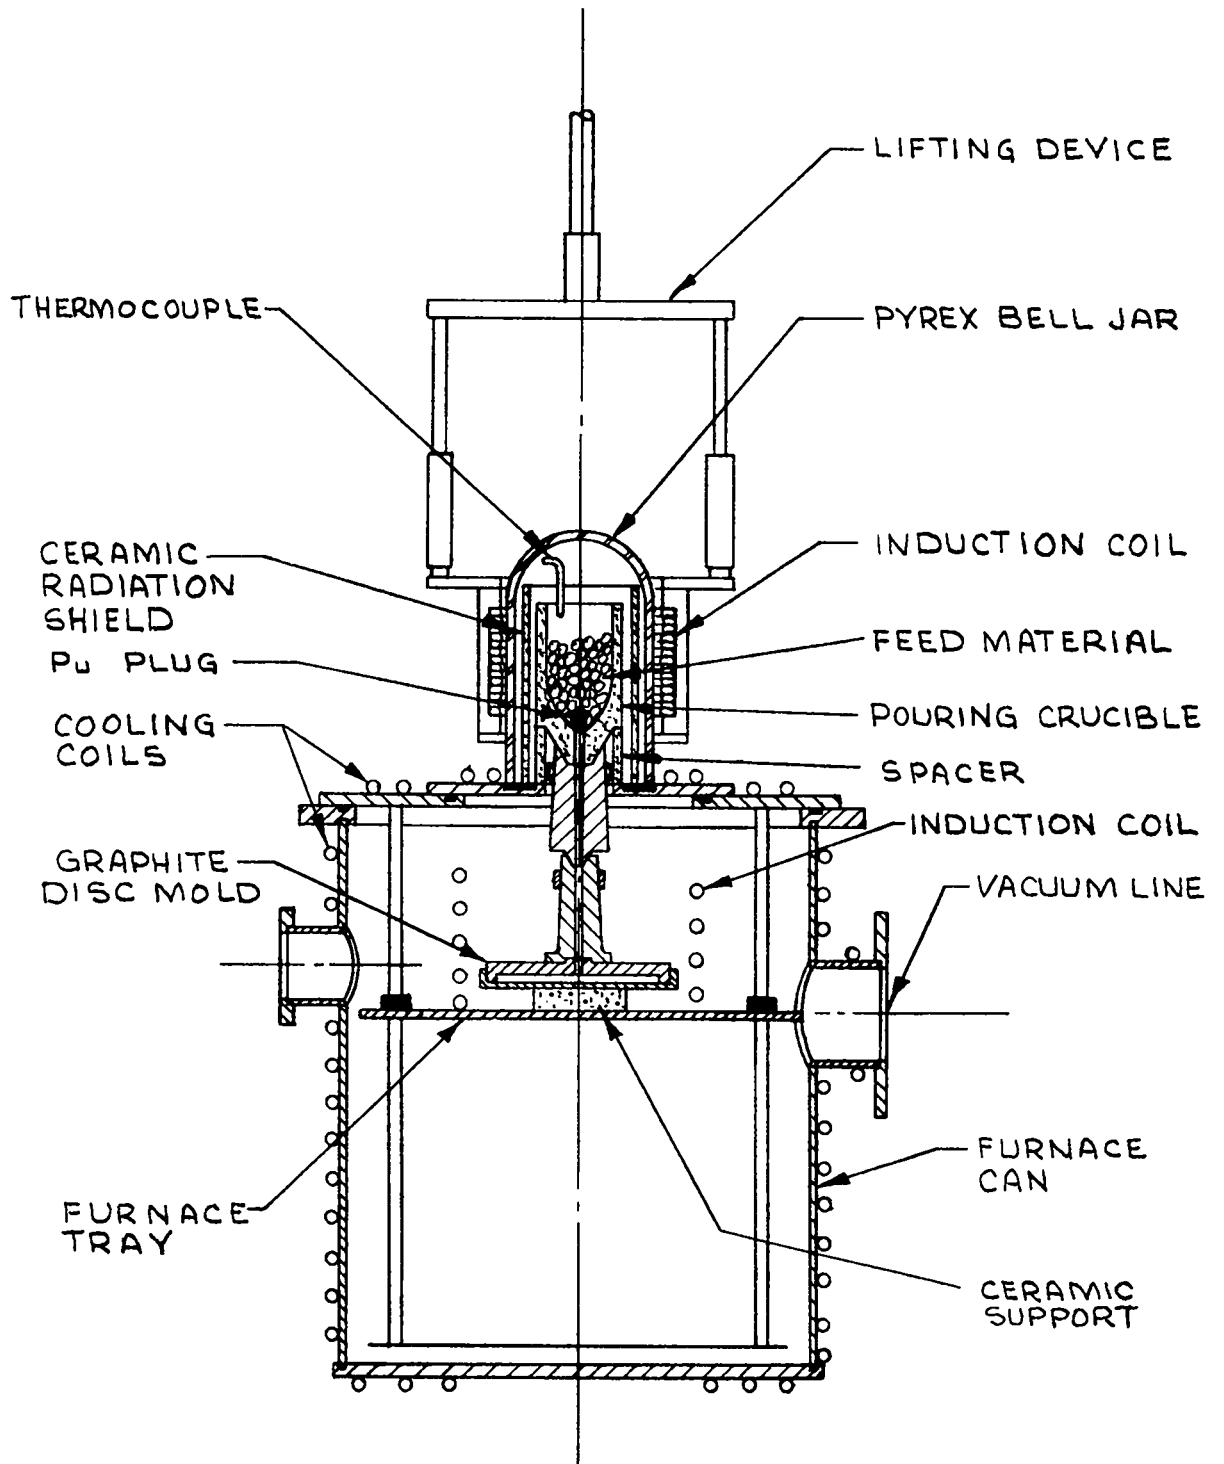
Pu Vacuum Casting Setup Using Frozen-Plug Technique
